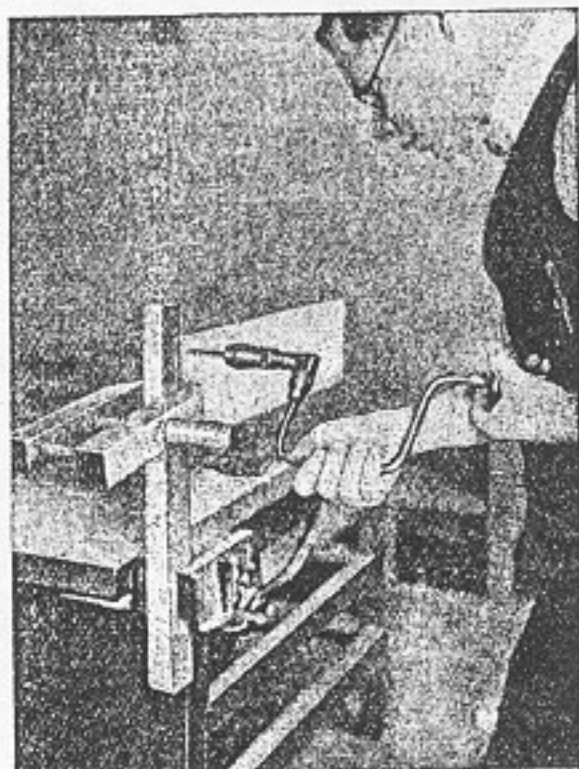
Before driving screws, it is of primary importance to know what size holes to bore for them.
